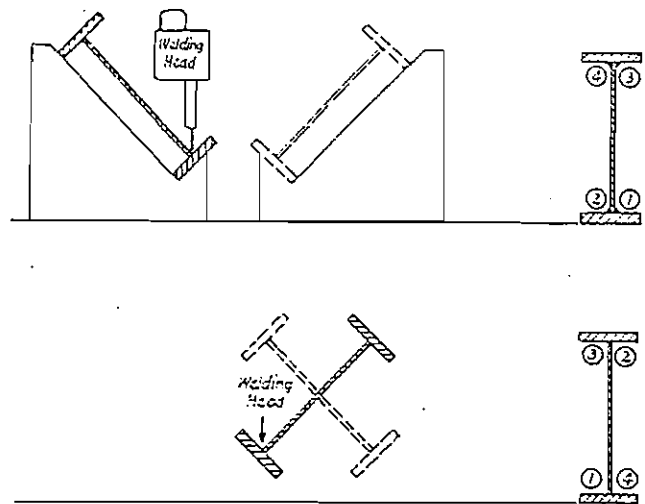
Proper welding position and sequence for fabrication when girder is supported by inclined fixture (top) or trunnion-type fixture (bottom).
